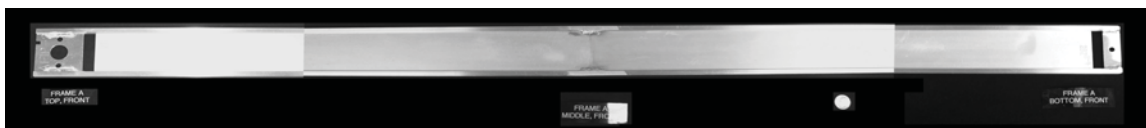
Monolithic fuel plate assembly containing two 57cm long fuel plates.
